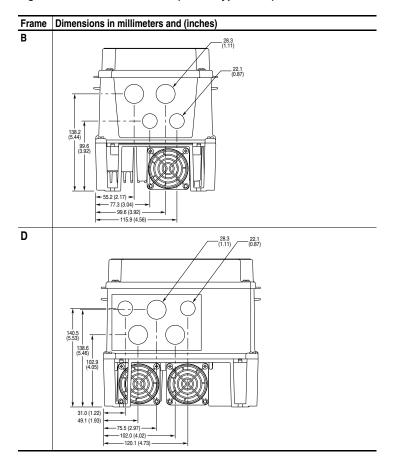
PowerFlex 70 IP66 (NEMA Type 4X/12) Bottom View Dimensions
